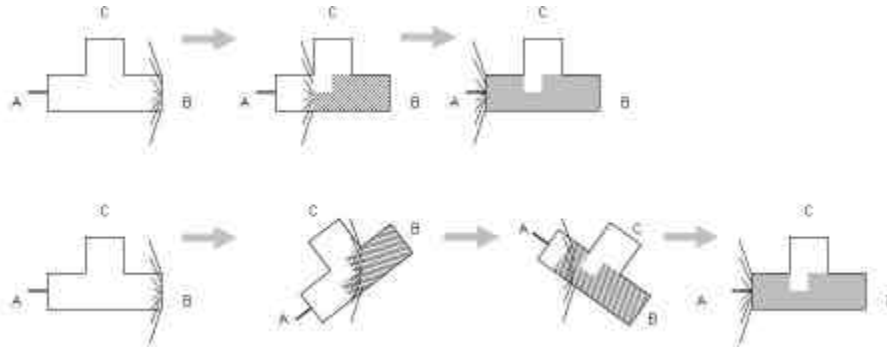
Change of the braiding direction in order to improve the reinforcement in the branch areas of the T-pipe
